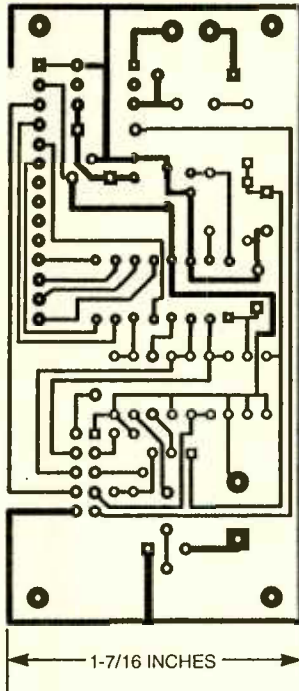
The Millennium Clock was assembled on a single-sided printed-circuit board, measuring 1 7/16 by 3 3/16 inches. A full-size template of the author's printed-circuit layout is shown here.
